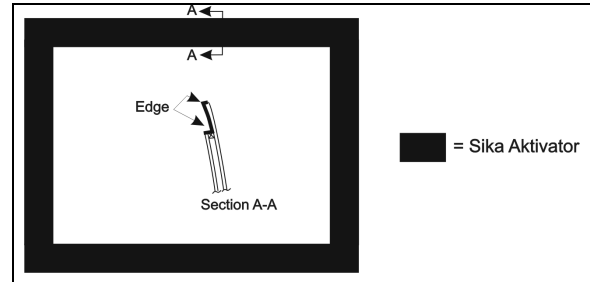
FACE FIXED WINDOWS - RUBBER SEAL INSTALLATION
